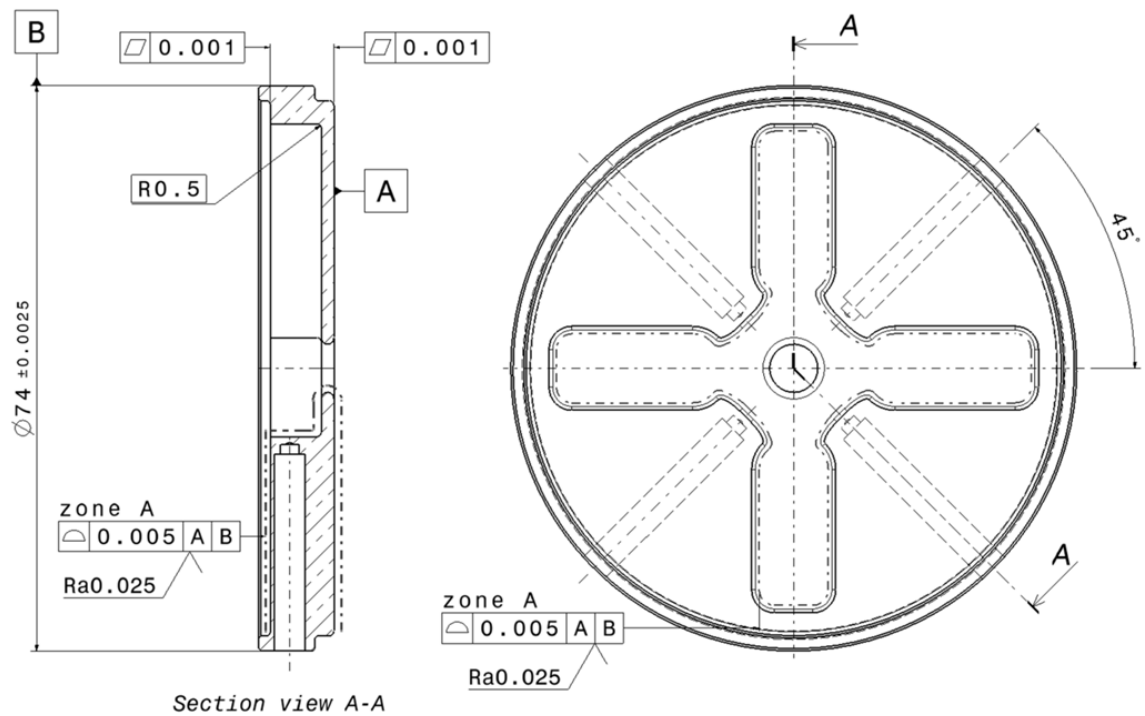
TD24 R0.5 disk drawing (Drawing by A. Solodko, courtesy of CERN).
